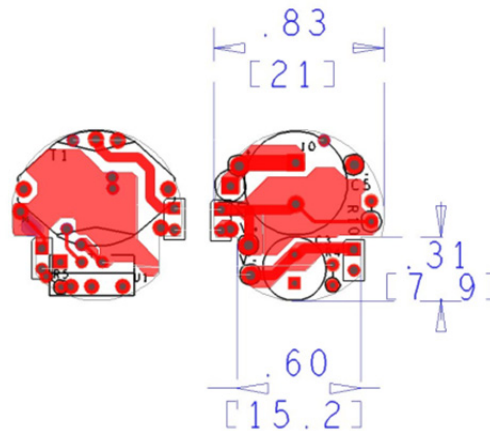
Buck-Boost Boards Board A and Board B Layout and Outline, Top Side.
